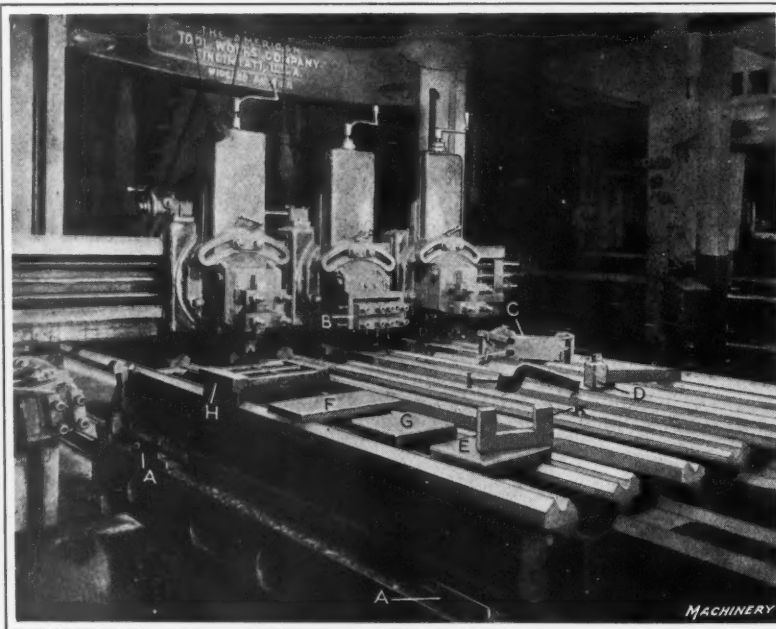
Close-up View of Tools and Work on the Machine shown in Fig. 1. Attention is called to the fact that various tools are shown set up for purposes of illustration; actually, these tools are used in sequence.
